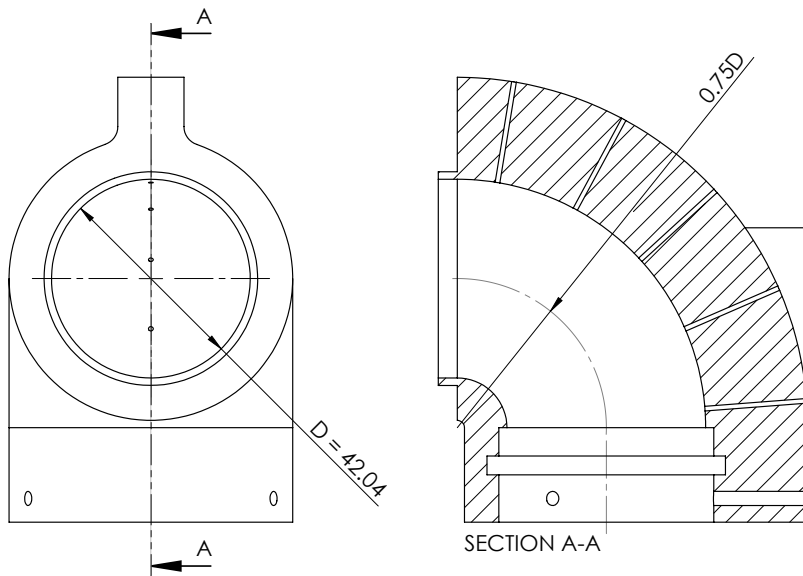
Mechanical drawing of the 0.75D elbow inlet designed to fit into the compressor inlet adaptor and house the linear thermocouple array.
